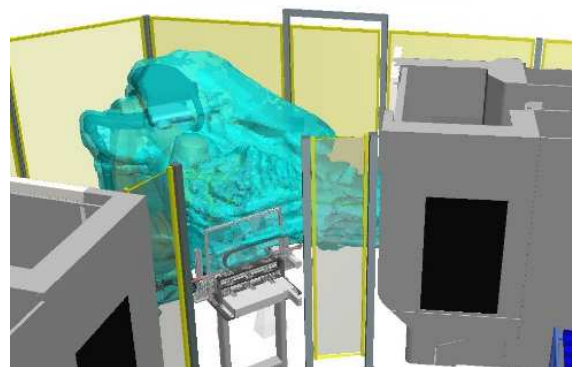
The workspace of the industrial robot in a complete cycle of feeding and inserting components into the flexible manufacturing cell (bushings and pins) [12]
